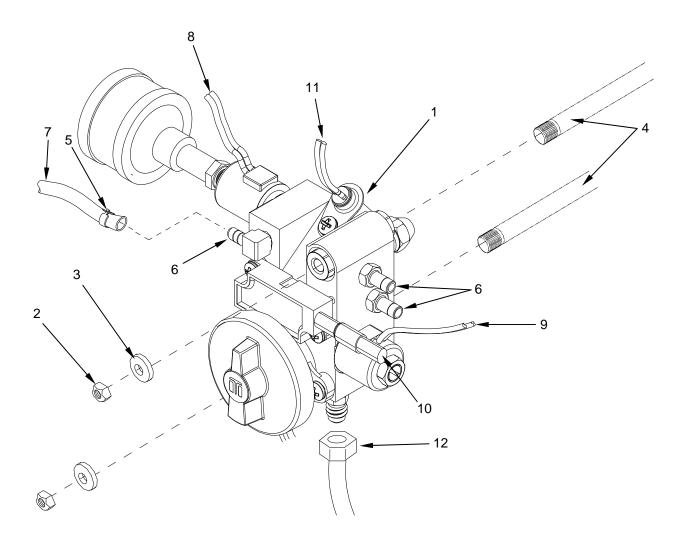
Remove/Install the Fuel Delivery Block Assembly from Burner Tube Mounting Studs.
